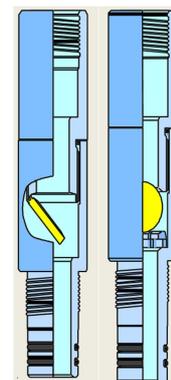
Flapper check valve assembly, Ball and seat check valve [10].
